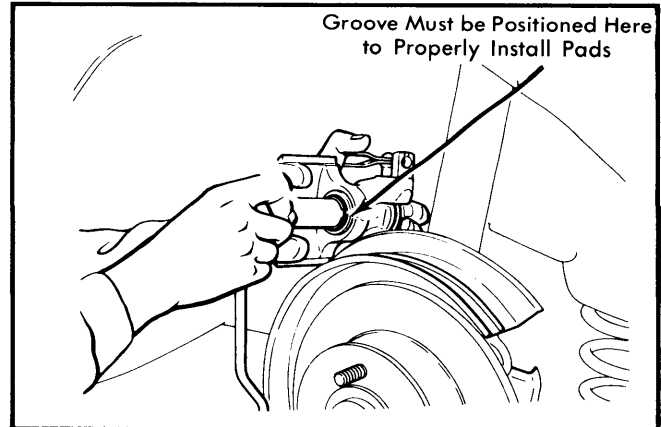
Positioning of Piston Stopper Groove on Rear Disc Brakes
